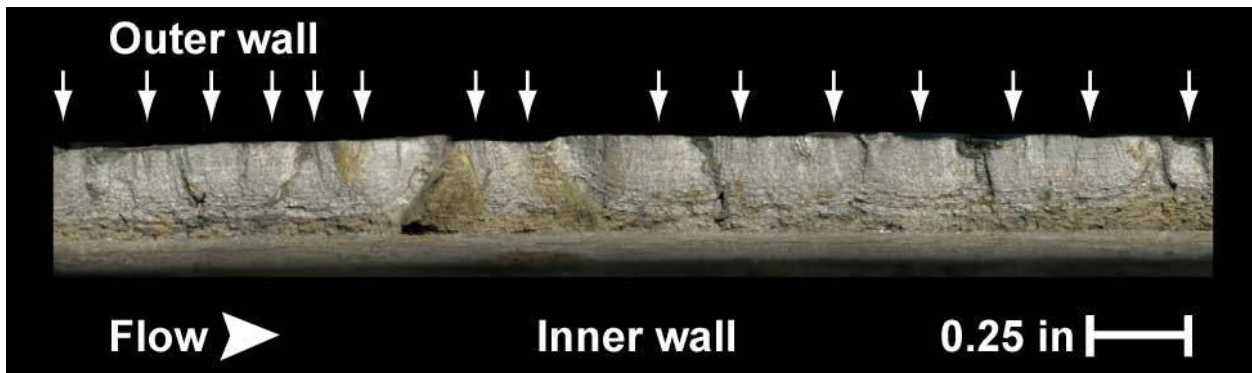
Fracture surface of a coalesced SCC crack that caused an in-service rupture caused by SCC/corrosion fatigue that occurred on Enbridge Line 6B in Marshall, Michigan in 2010. The surface has been cleaned to remove corrosion scales. Curving beach marks on individual cracks can be seen. White arrows indicate origins of individual SCC cracks that later coalesced and joined. Ratchet marks are also visible where two cracks have joined. Reproduced from [29], courtesy of the National Transportation Safety Board.
